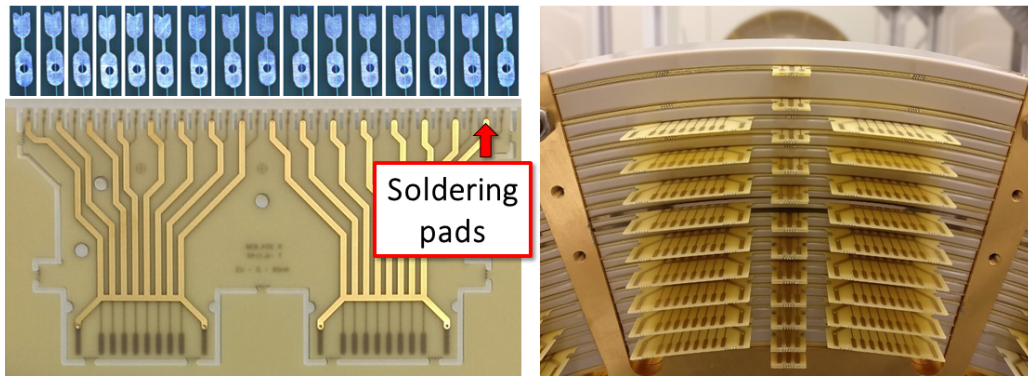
Left: one of the PCBs where wires are soldered. The soldering pads are highlighted. Right: wire-PCBs stack with PEEK spacers between the spokes of the CDCH endplate.
